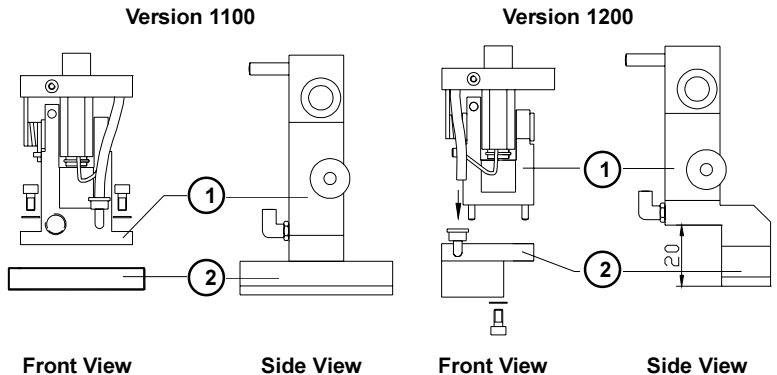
Versions of the Applicator pad holder (1) and pad (2)
